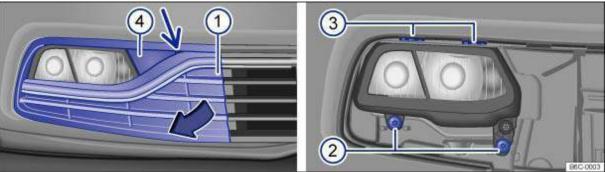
In the front bumper, right-hand side: removing the cover and headlight (variant 2)
